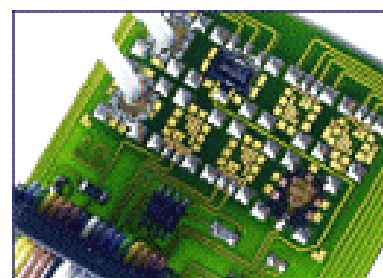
In the MATAS concept the sensors or other MST parts are packaged using standard PCB technology. The PCB taking care for all electrical connections is bonded with a silicon or glass structure enabling all fluid connections. The packaged MST parts form replaceable and testable components. The technology is applicable to a large variety of MST parts from various suppliers.
